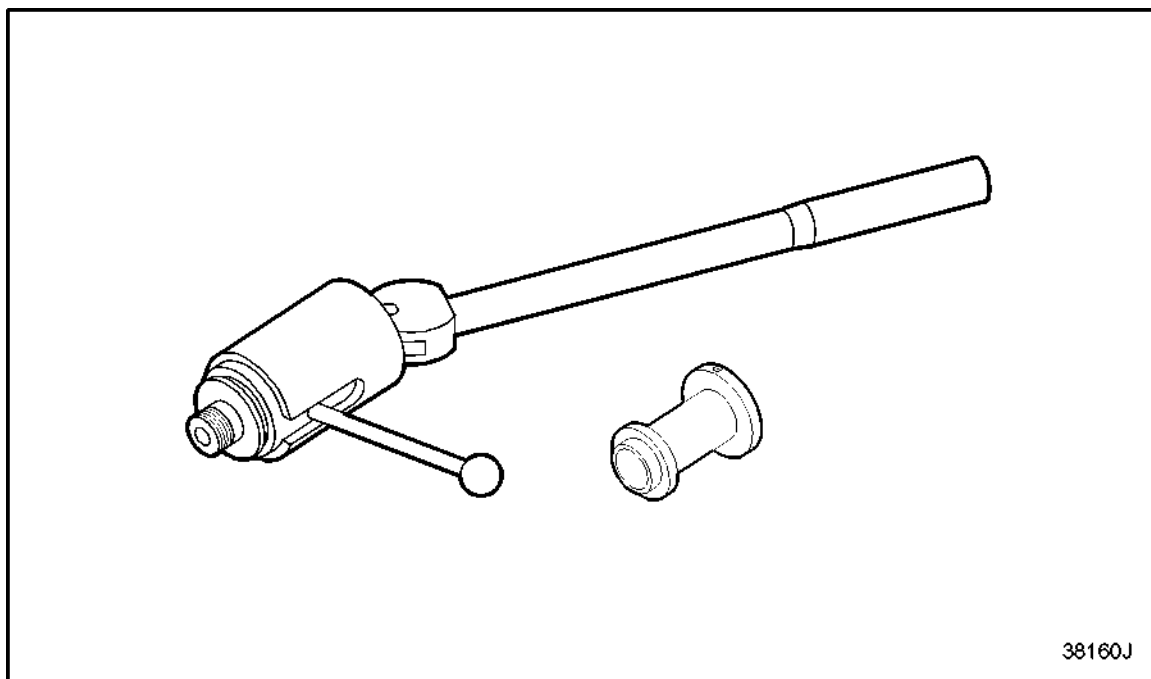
Valve Seat Insert Remover (2 Valve), J 23479-253
